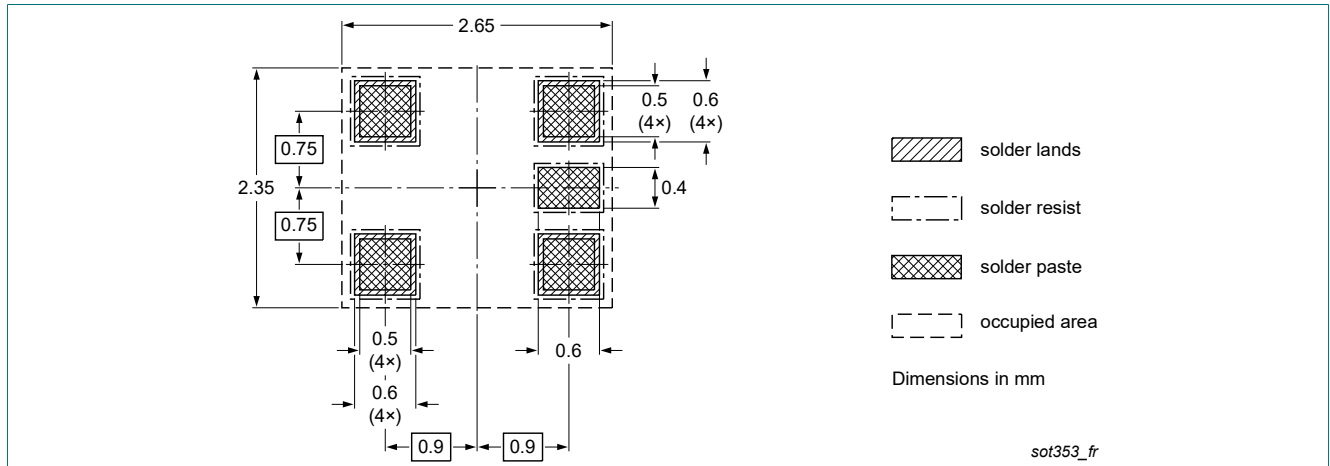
Reflow soldering footprint for TSSOP5 (SOT353)
